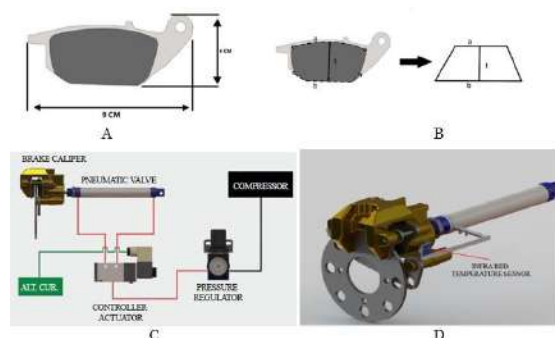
Brake Pads dimension and pneumatic wiring diagram
